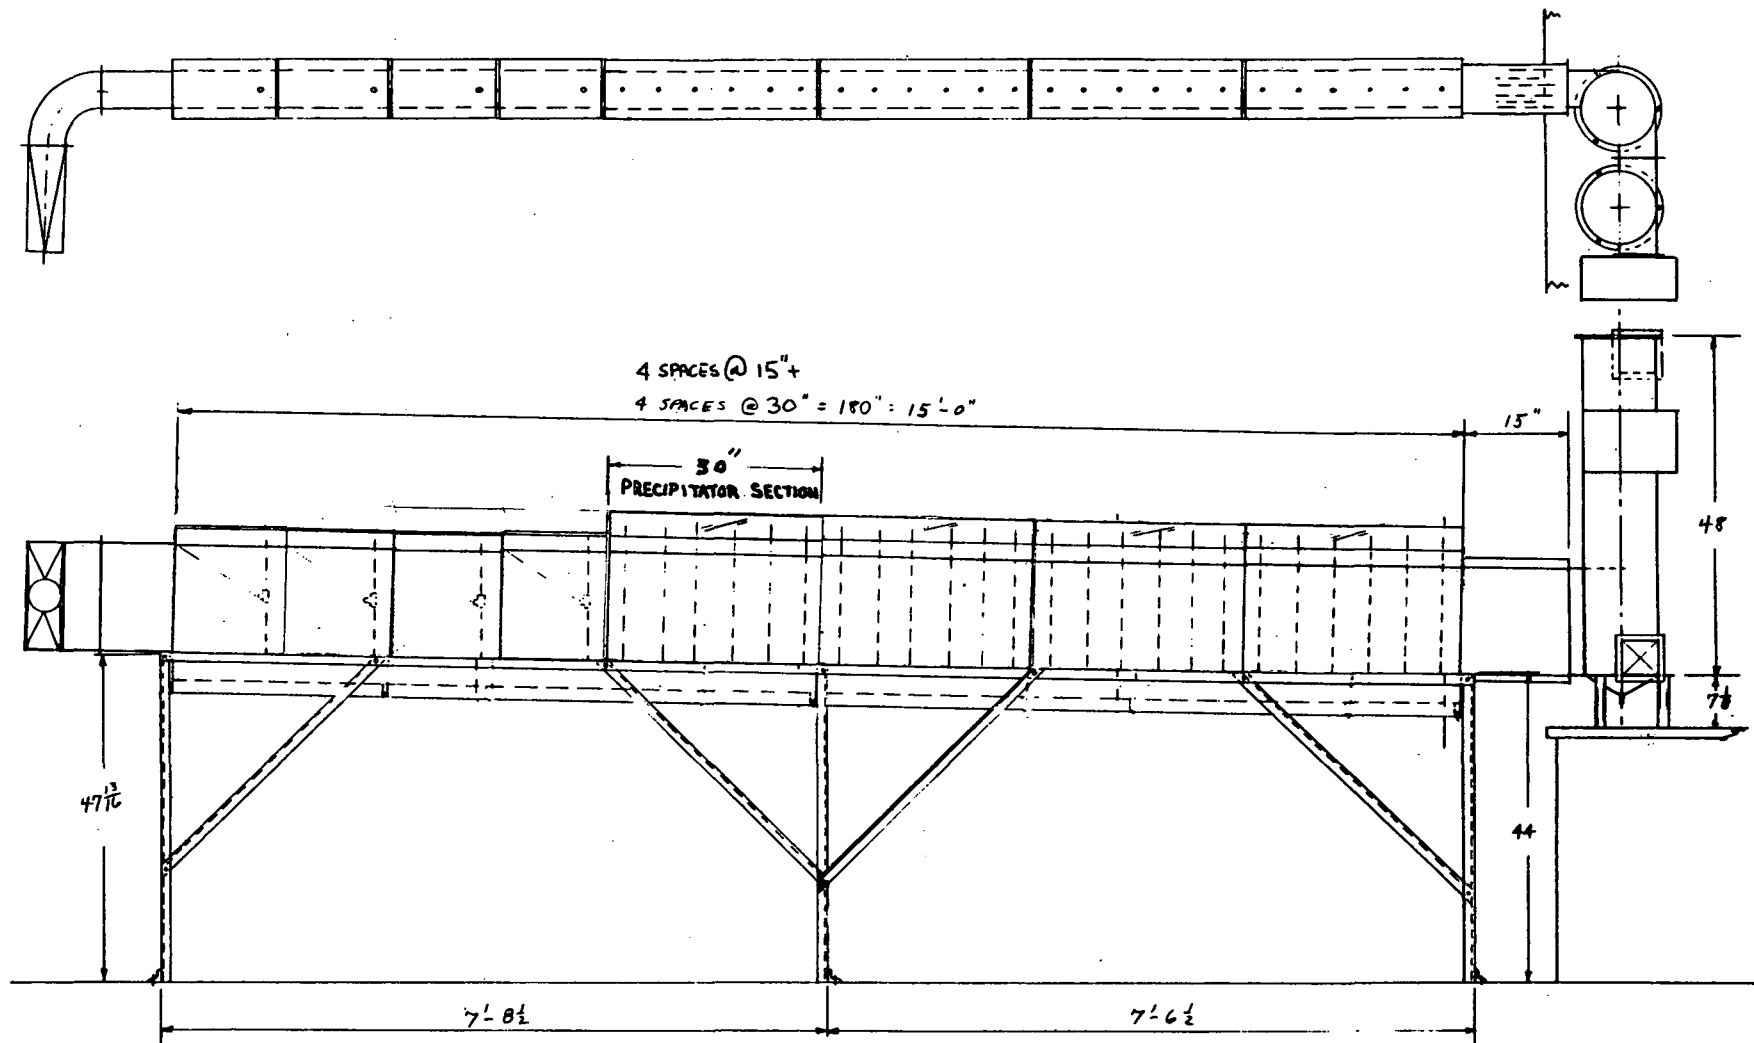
Plan and Side Views of Pilot ESP Test Facility
